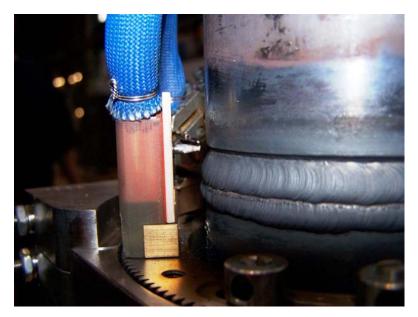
A third view of the C-Frame welding approach used for CANDU reactor tubing.
